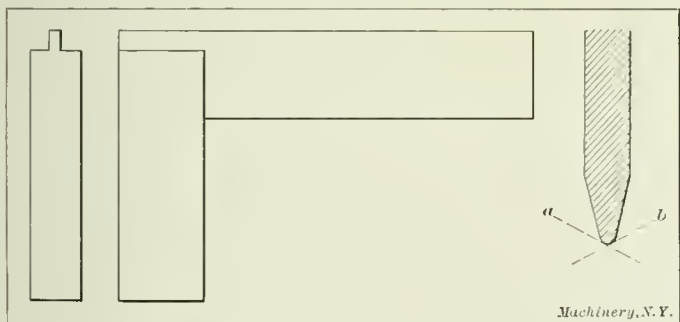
Try Square and Enlarged Section of Knife-edge Blade
